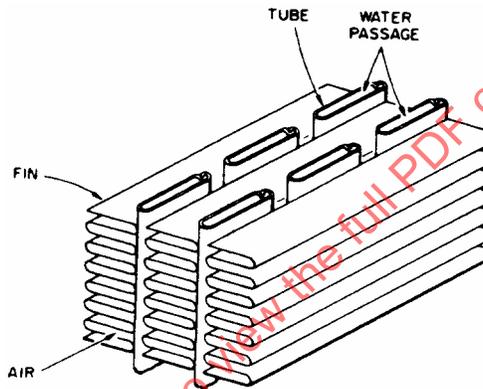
TYPICAL TUBE AND SERPENTINE FIN CORE
